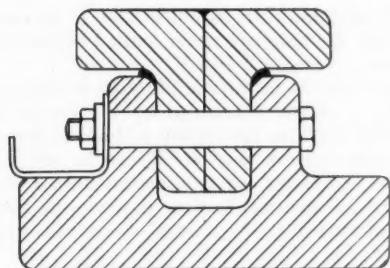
Inboard end of the wing skin to rear spar joint on the de Havilland Comet 4.
